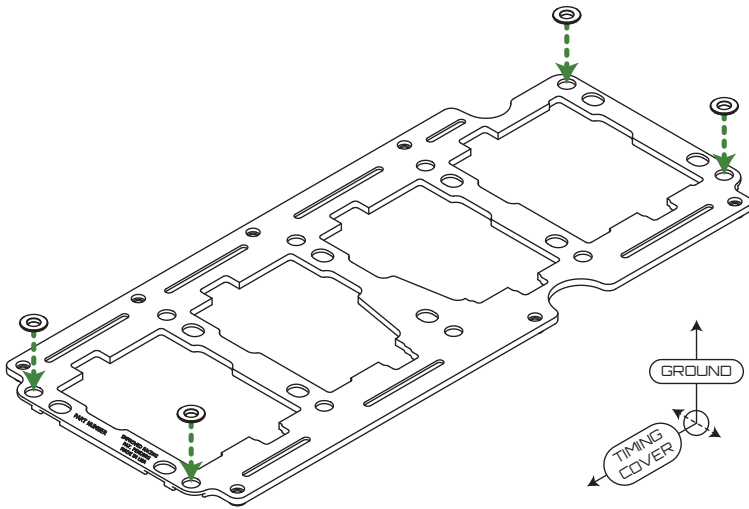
Inserting the Reducer Bushings for Factory Main Studs
